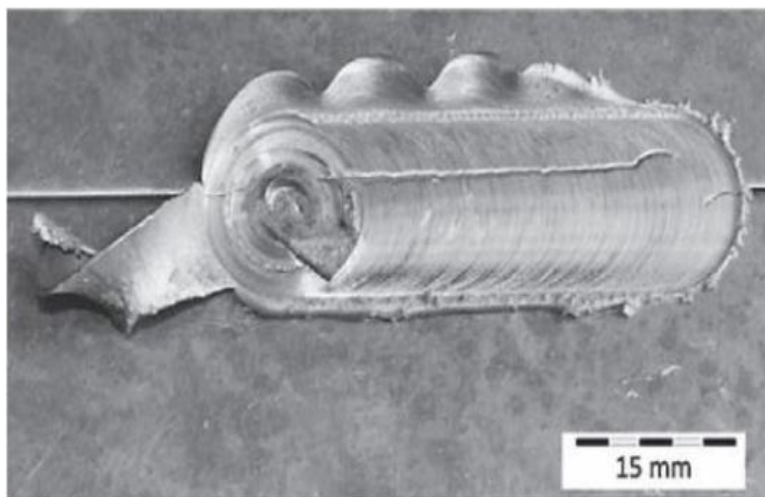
Weld with excessive flash on the outer edges of the surface [33].
